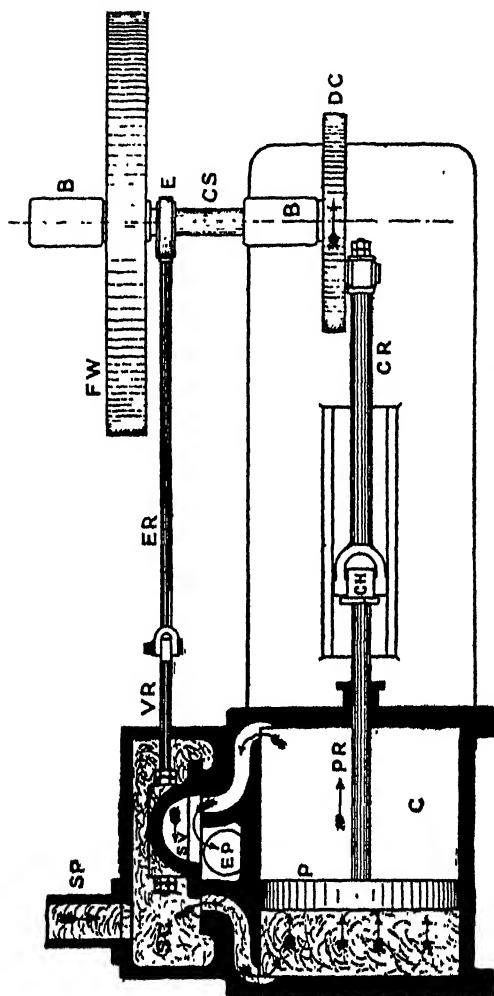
SECTION OF SIMPLE STEAM-ENGINE.
